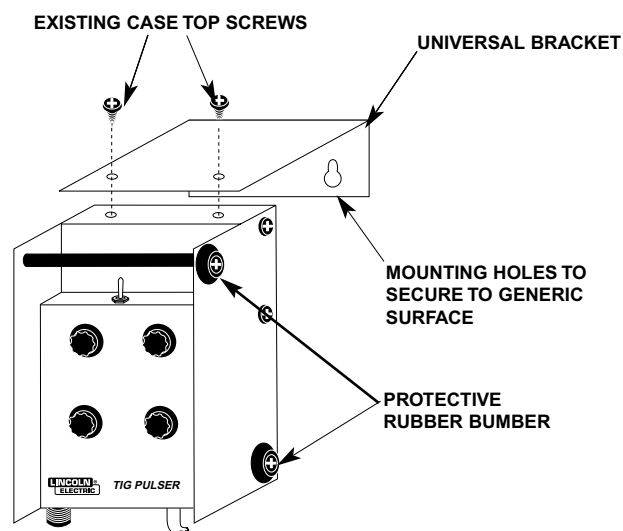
Universal Mounting Bracket Installation for mounting to a generic surface.
